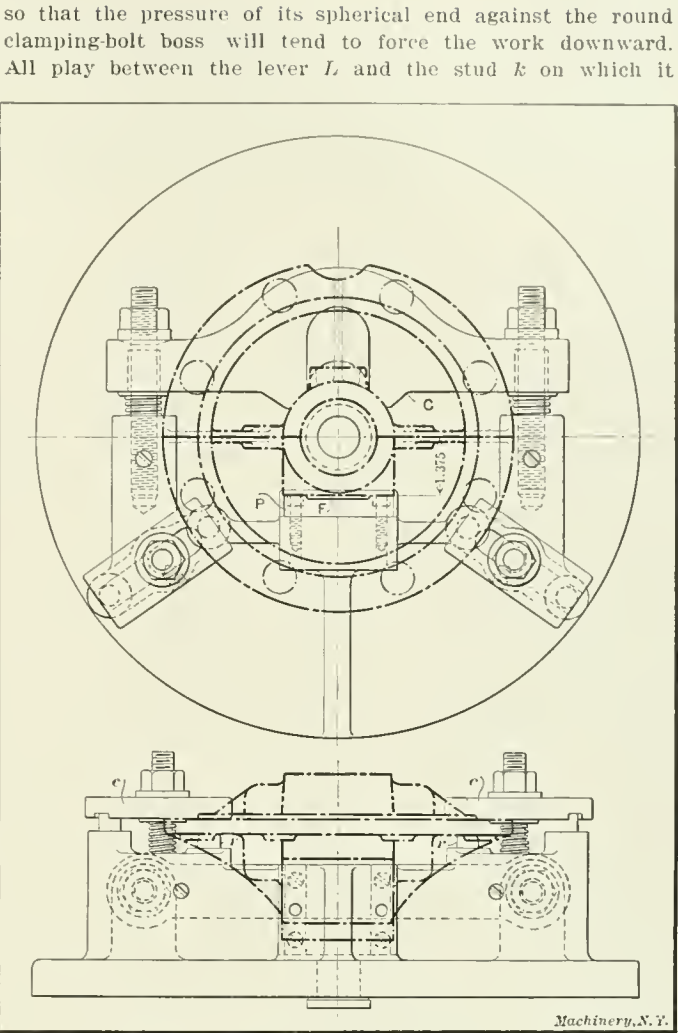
Fixture for Chucking and Reaming 2-inch Hole in Bearing
